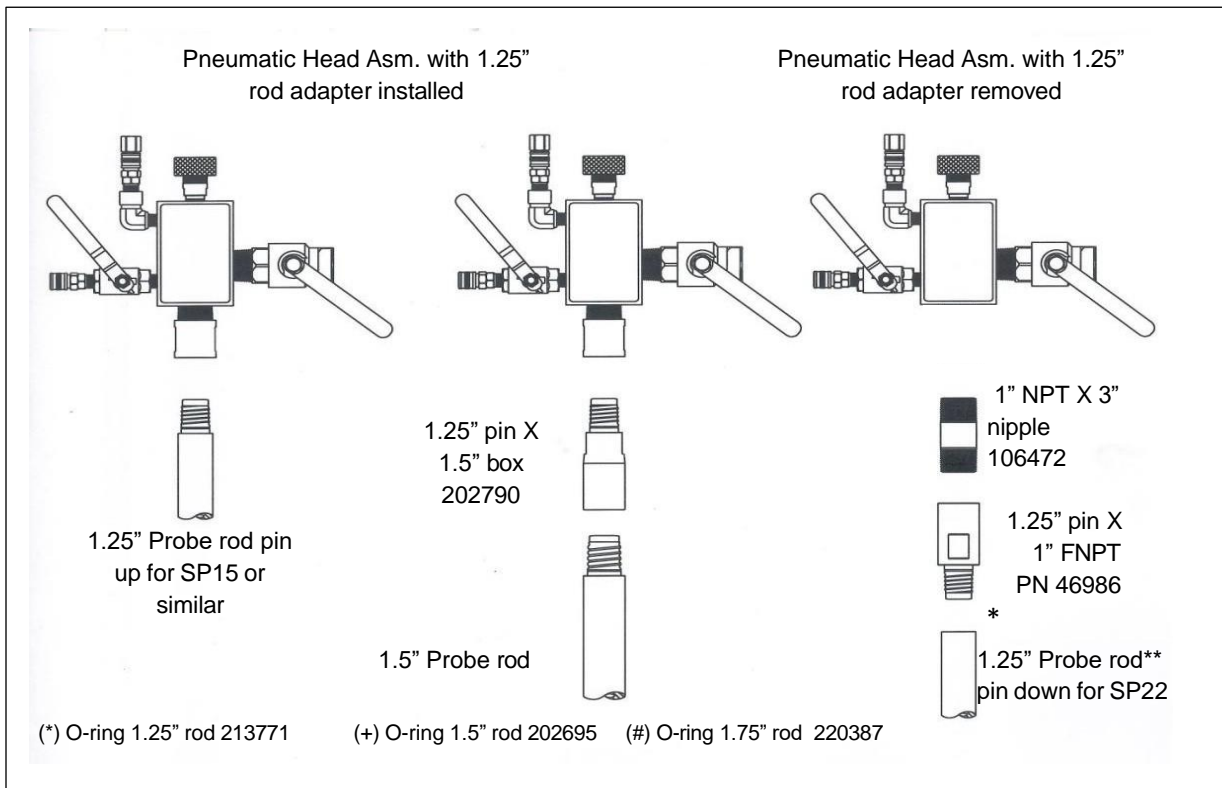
Installation of the pneumatic head on different probe rod/groundwater sampler configurations. When slug testing PVC wells additional PVC adapters will be required to attach the pneumatic head to the well casing (Geoprobe® 2002b).  Because of radius change in ID of 1.25" light weight rods they cannot be used for slug testing.
